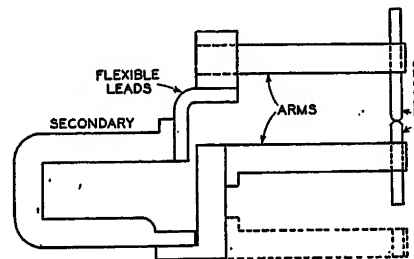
BOTTOM CONNECTED SPOT WELDER
